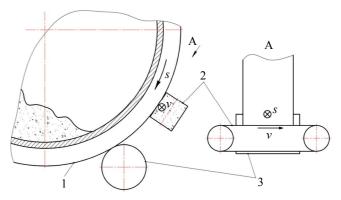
Scheme of band grinding of the bandage on a rotating furnace1 – bandage; 2 – cutting tool; 3 – supporting roller
